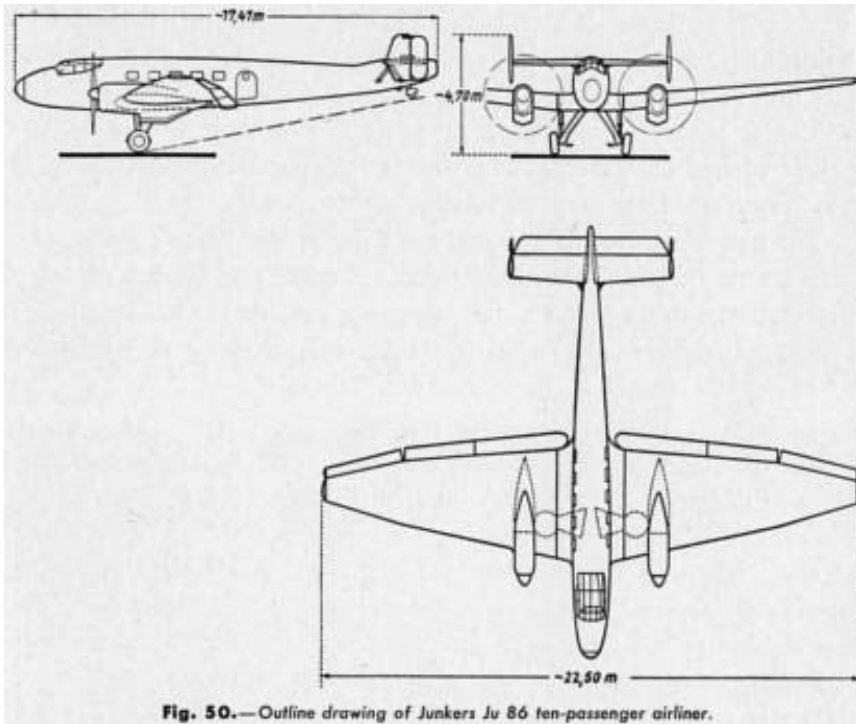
Outline drawing of Junkers Ju 86 ten-passenger airliner.
